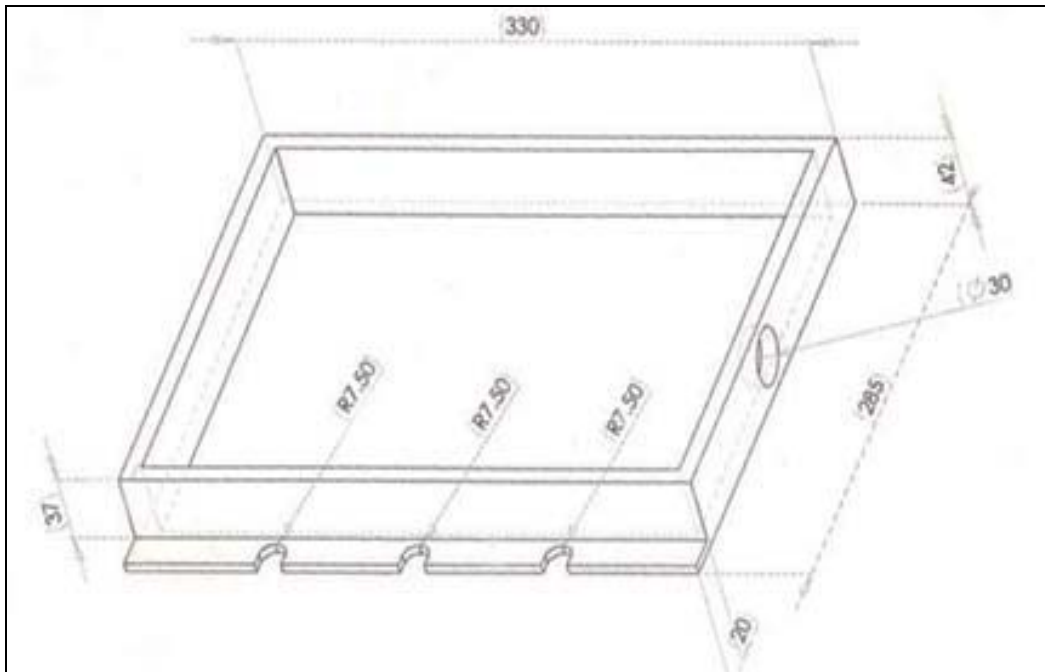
SolidWorks® drawing of a burst tray insert: isometric view.
